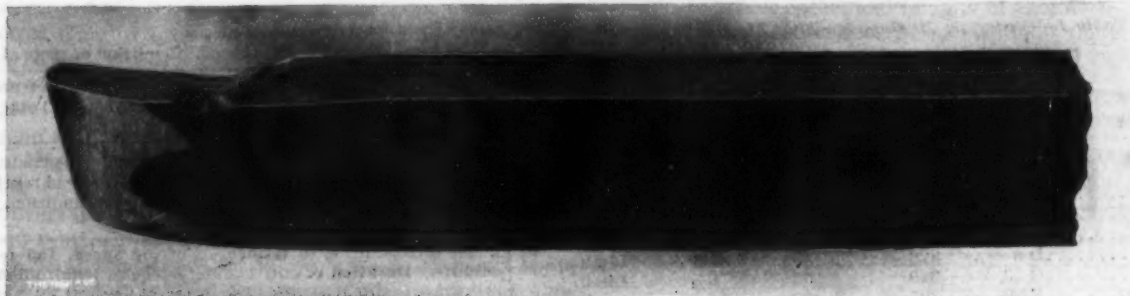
Condition of a No. A-2 Tool After Finishing Nine Back Gear Sleeves.
